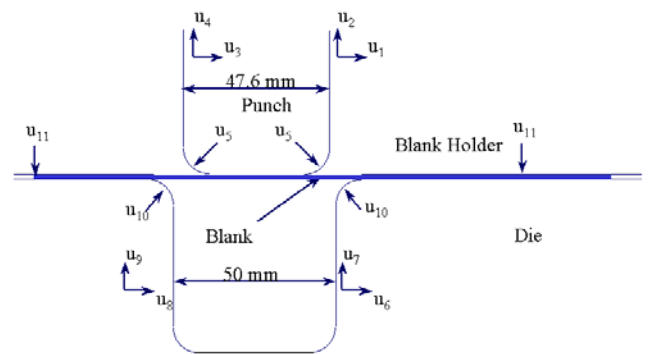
Shape and Configuration Parameters for S-rail Stamping Process
